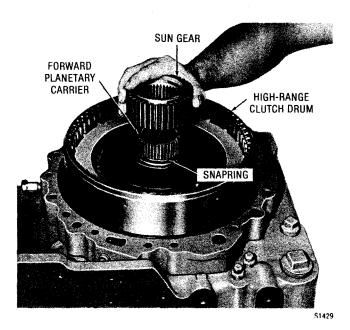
Removing low-range planetary sun gear (TRT 2221-3, 2421-3 with underdrive)
